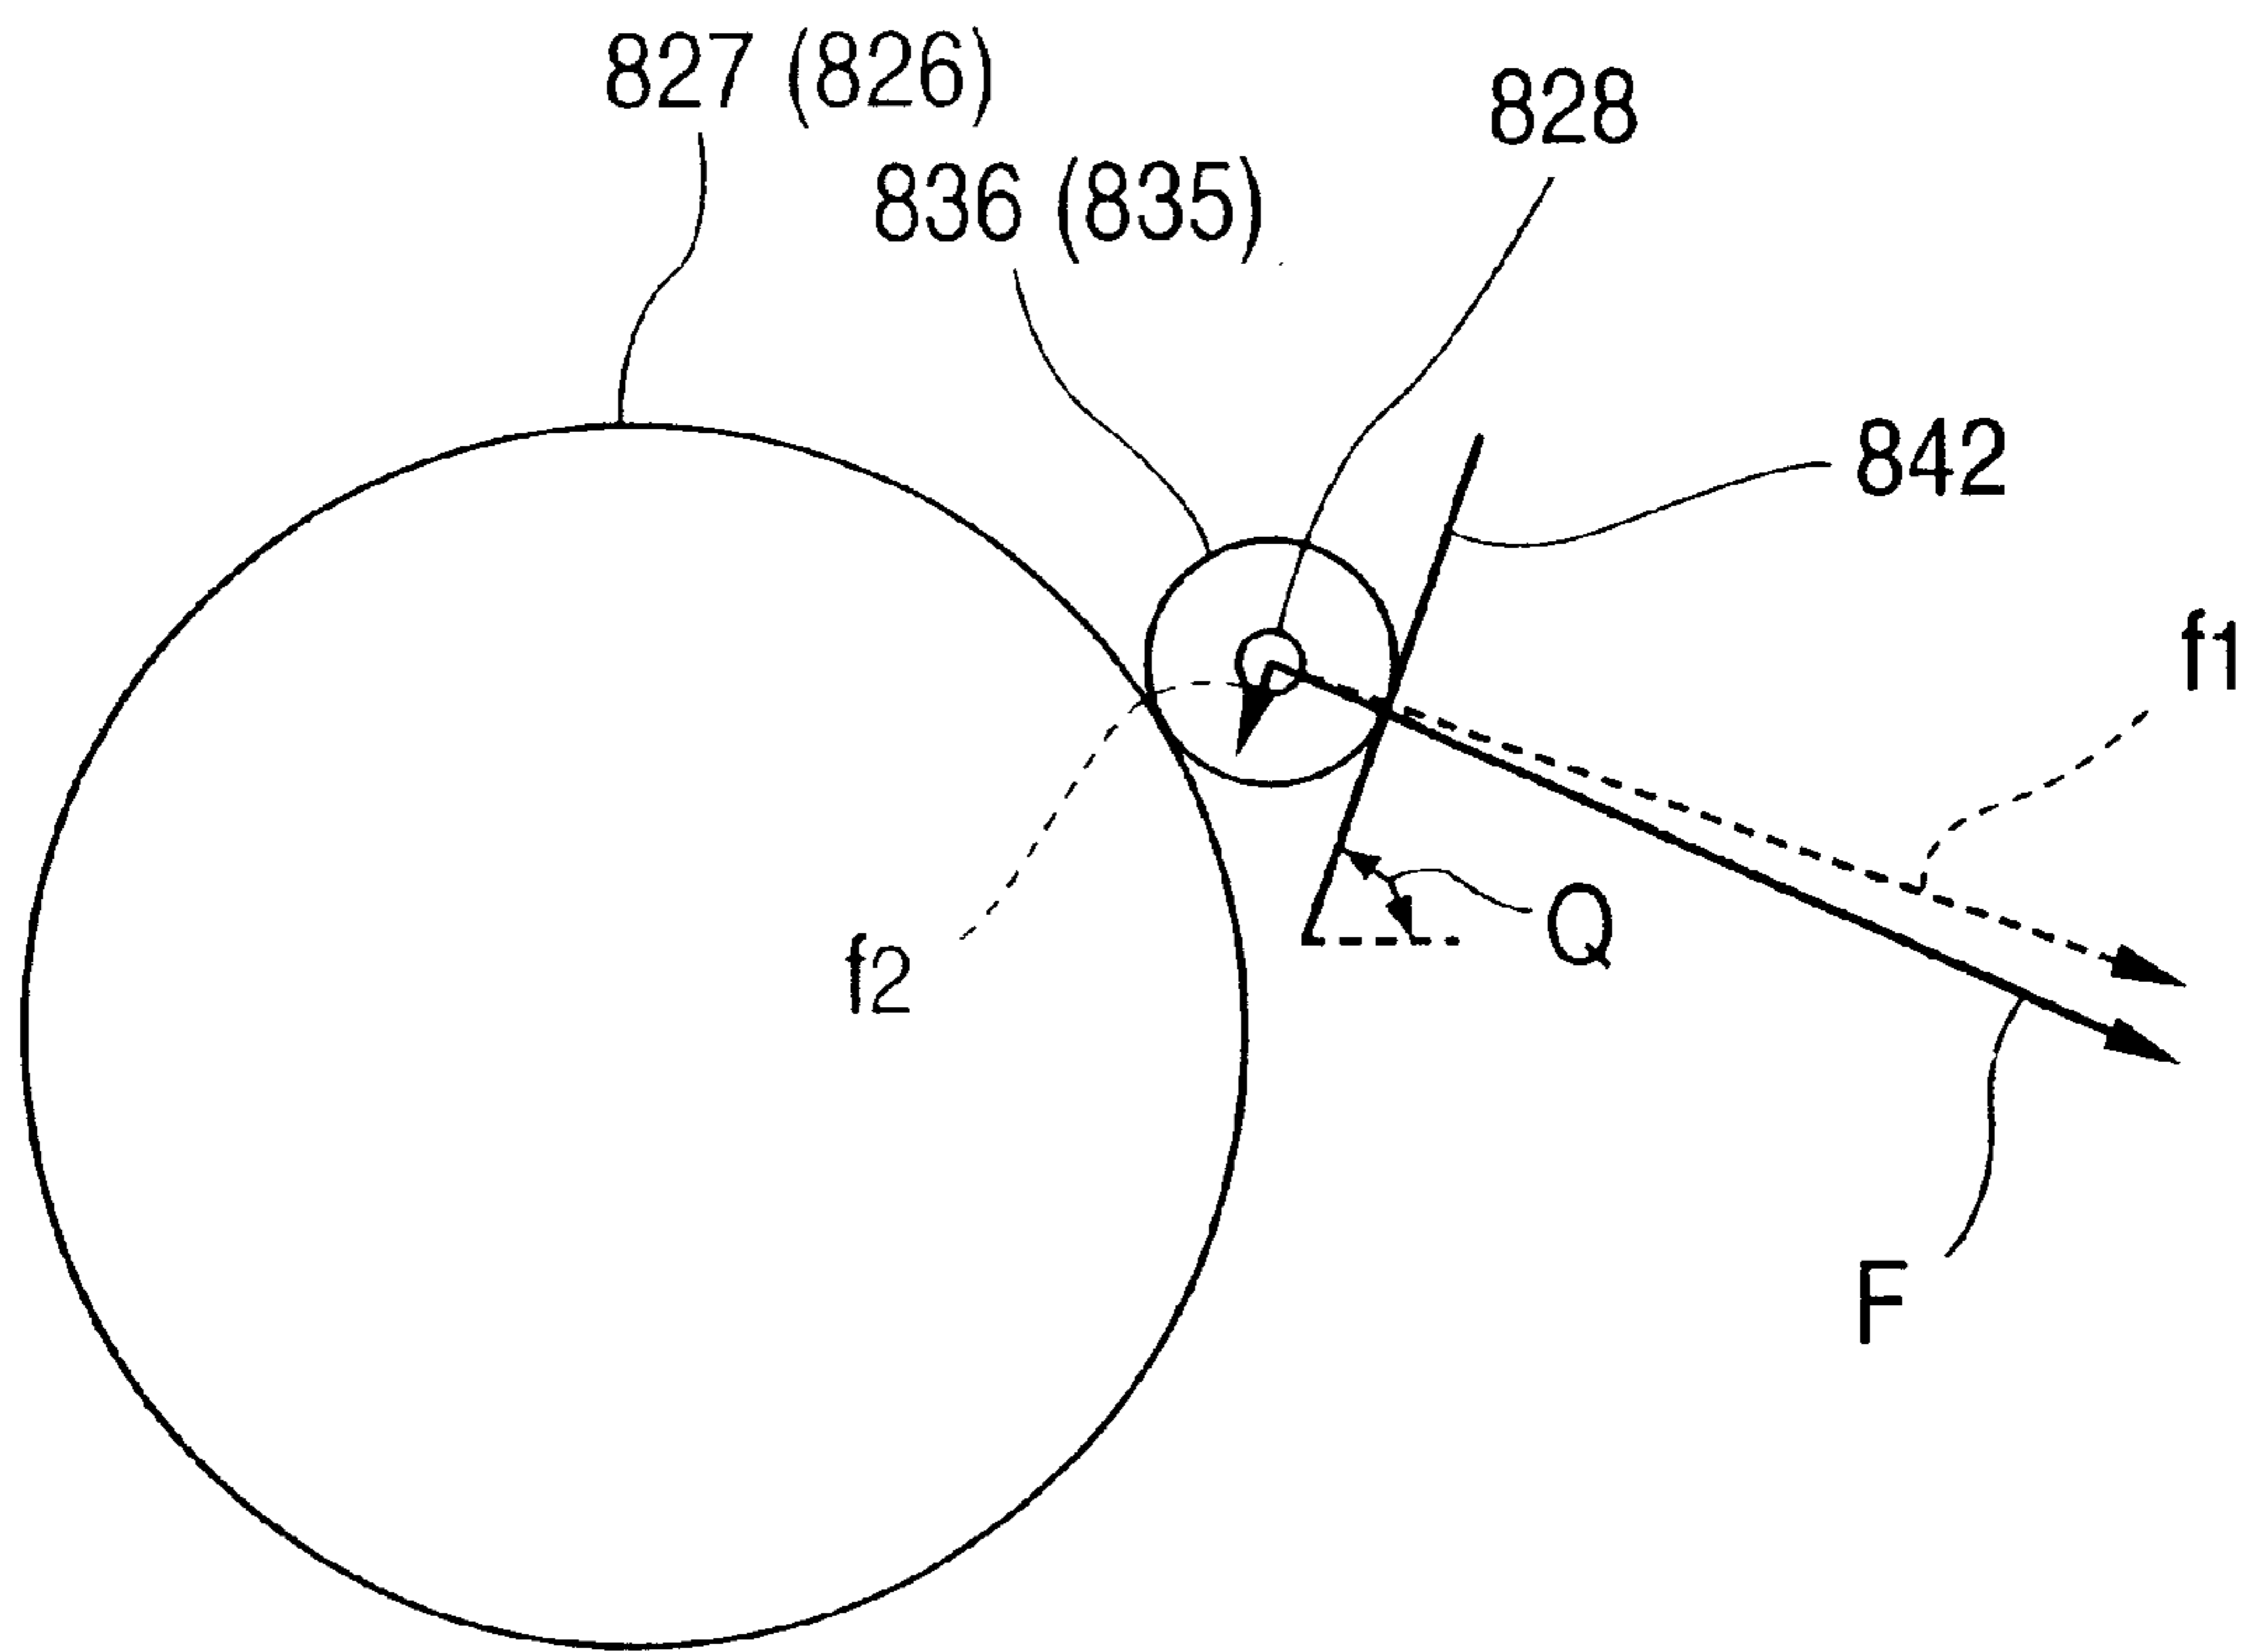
IMAGE-FORMING MACHINE WITH PHOTOSENSITIVE DRUM MOUNT
